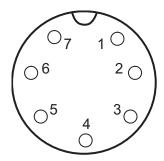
Power supply plug, 7-pole (rear view of plug, solder side)
